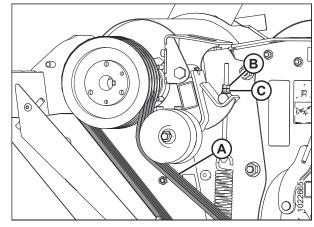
Jam Nut and Adjuster Nut on Left Side of Pull-Type
